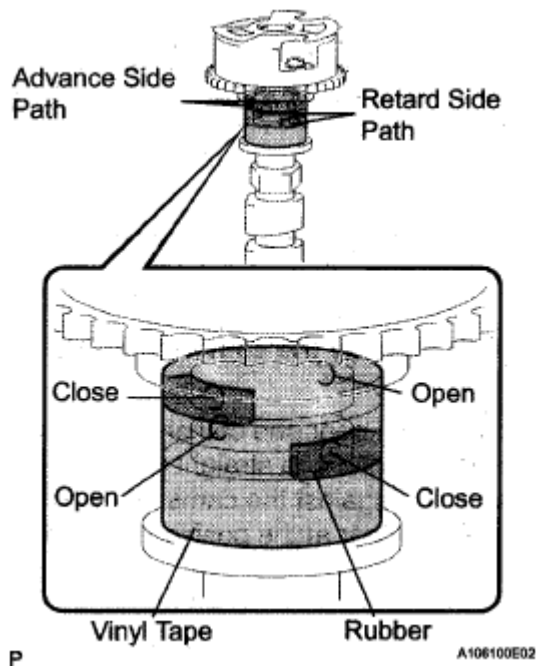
Covering Oil Paths Of Cam Journal With Vinyl Tape
